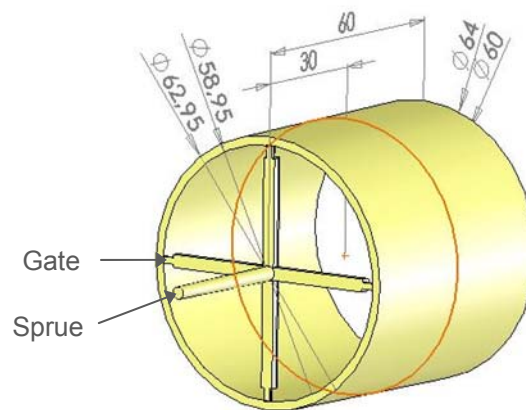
Tubular part dimensions with spider gating system (4 gates) [185]
